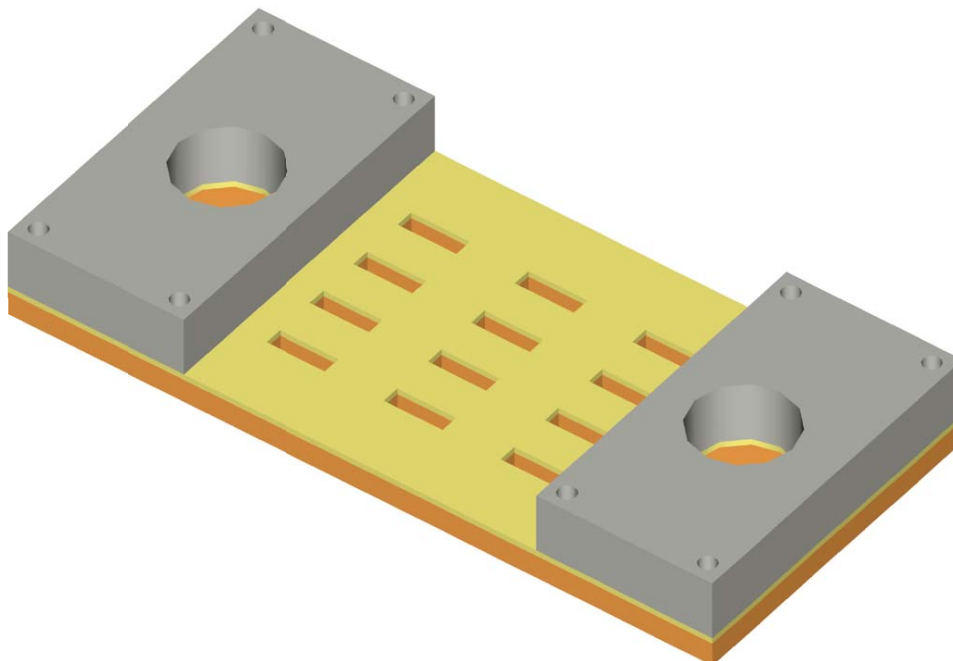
Built cold plate; the heat sources are located on the reverse side. It consists of four parts: copper base plate, brass cover plate, and two aluminum blocks featuring screw threads for the tube fittings. Dimensions are shown in Fig. A.1 in the Appendix.
